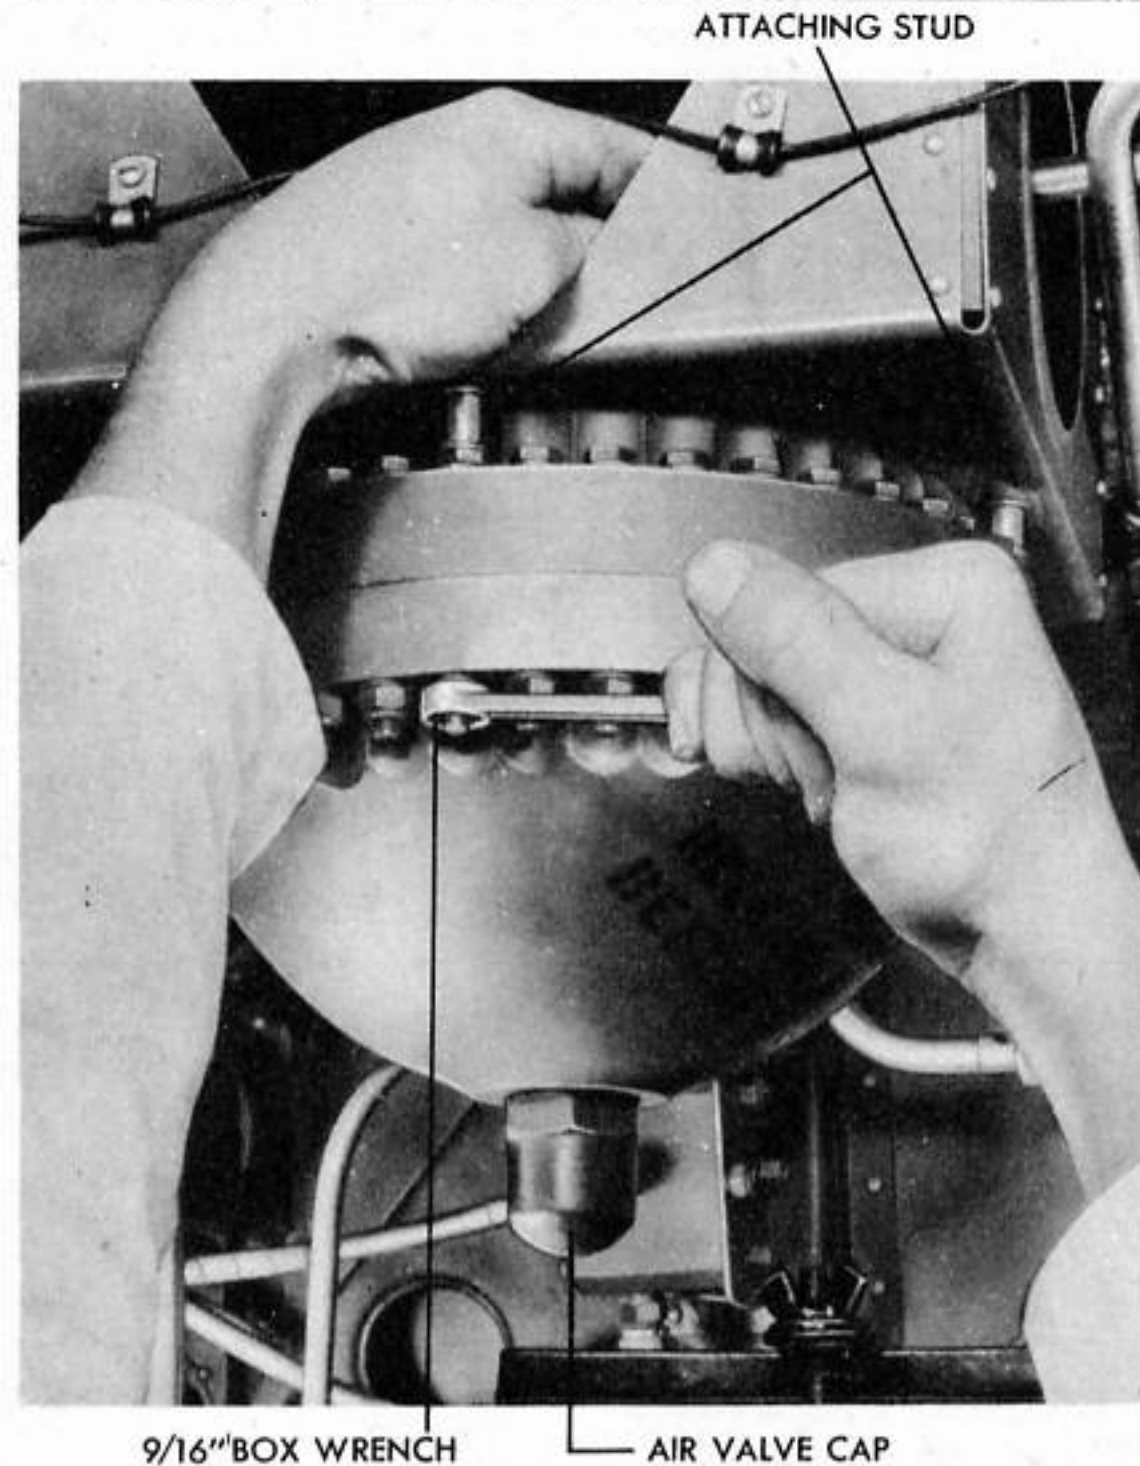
REMOVING HYDRAULIC PRESSURE ACCUMULATOR
